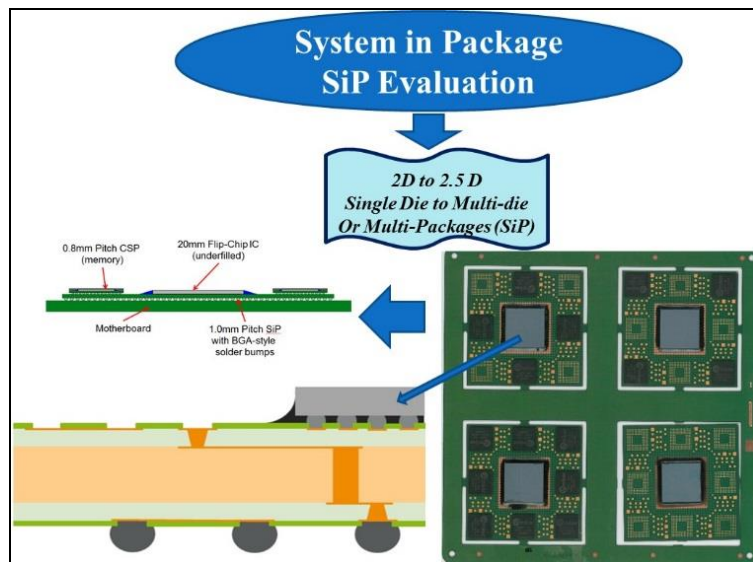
SiP on a fine-pitch ball-grid array (FPBGA) interposer (on the right) with schematic drawing showing internal lay-up.
